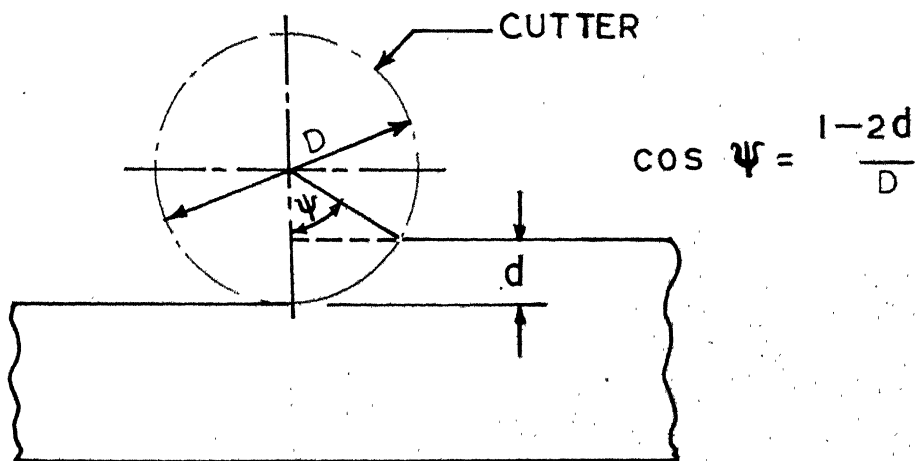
GEOMETRY OF THE PLAIN MILLING PROCESS
